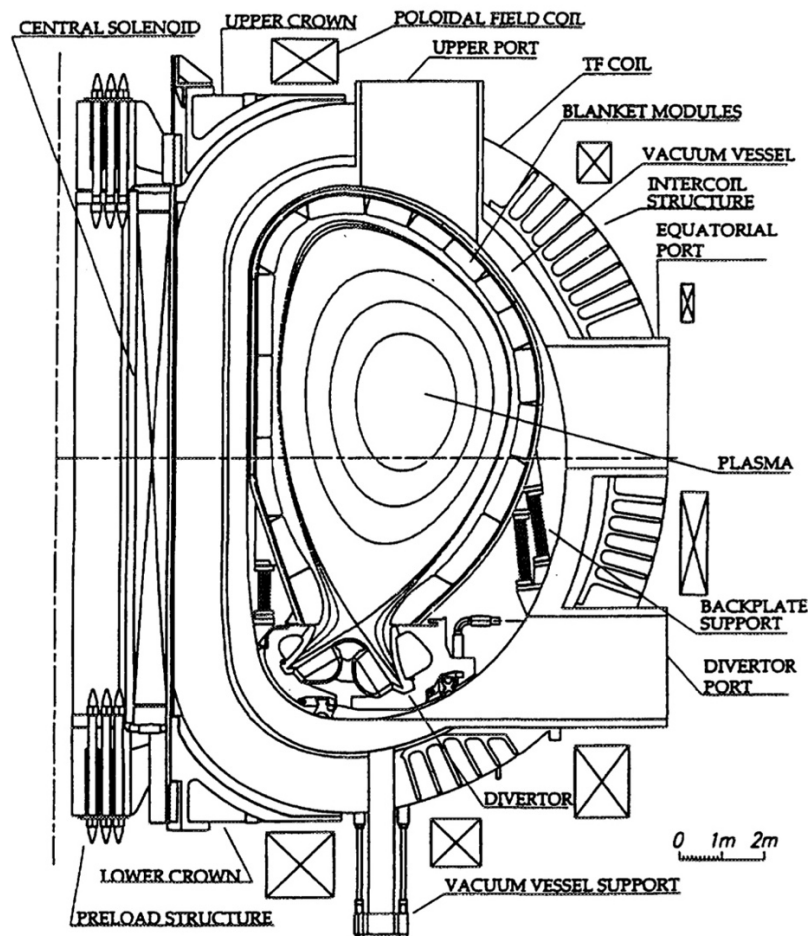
EDA Detailed Design Cross Section
